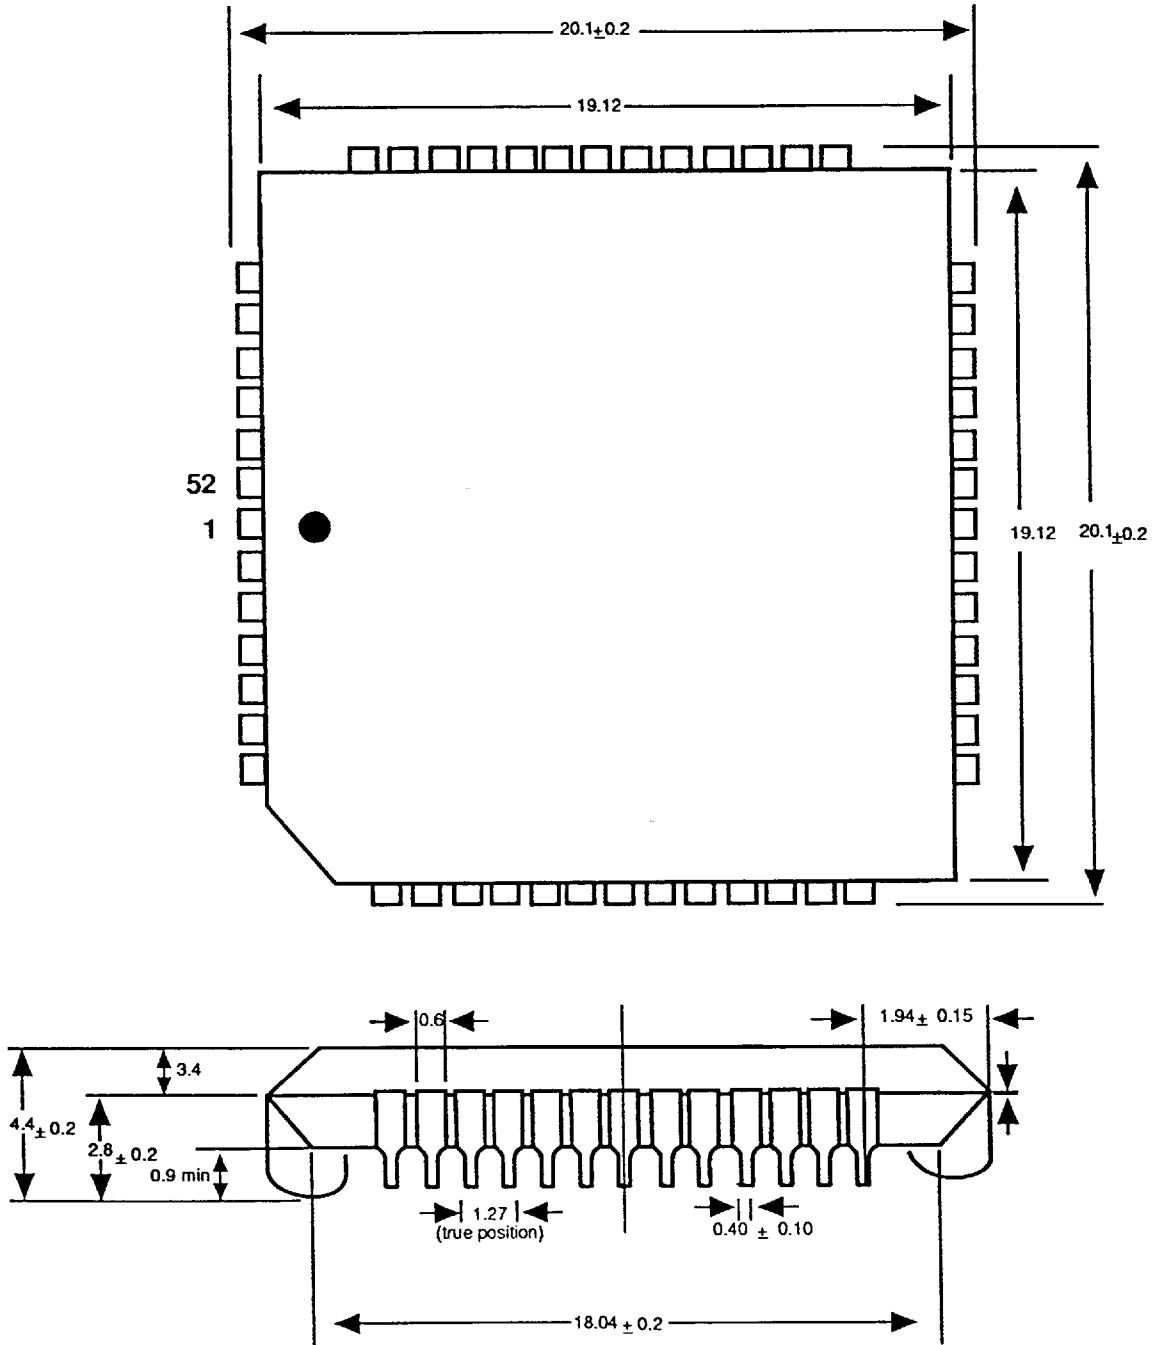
TKD8001 Packaging Diagram (dimensions in mm)
